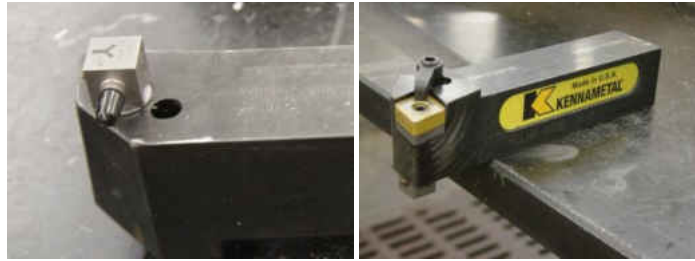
(Left) Rear side of OD tool Holder (Right) Complete OD tool holder assembly
